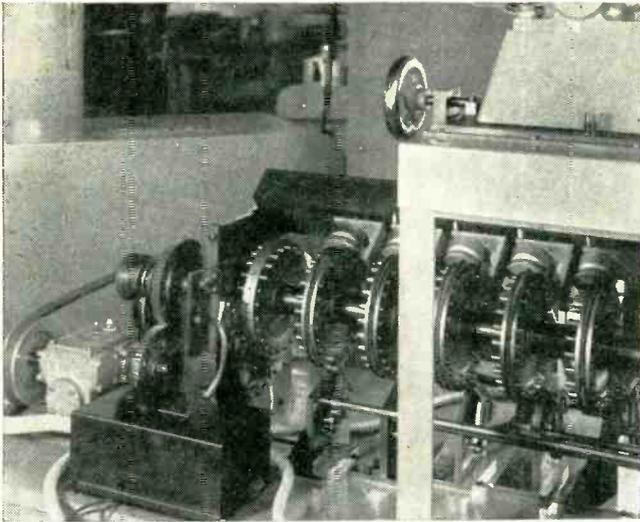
Movable pins on memory unit carry dimensional information and set chutes for proper parts disposal
